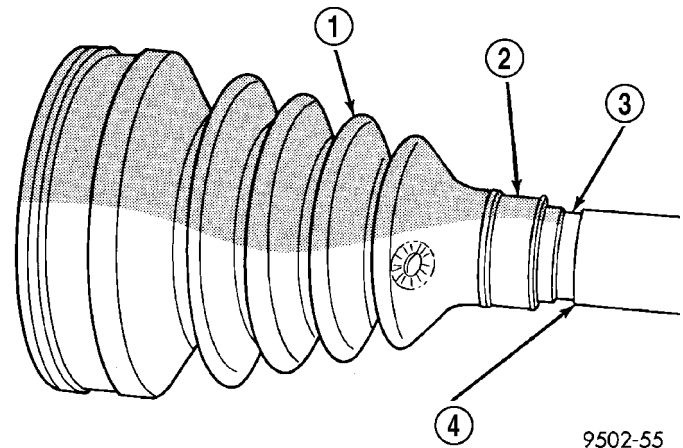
Sealing Boot Installation on Interconnecting Shaft
